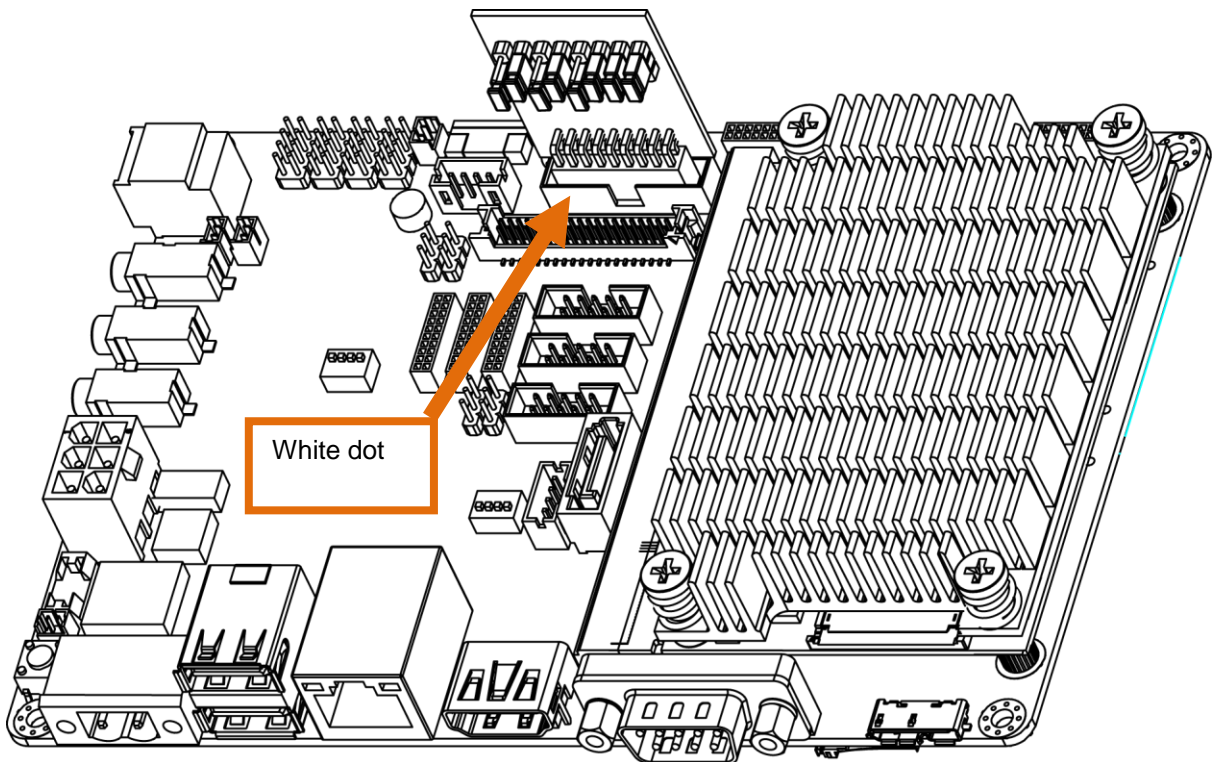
the EDM-MNF-BOOT PCB inserted in the MNF connector of the carrier board
